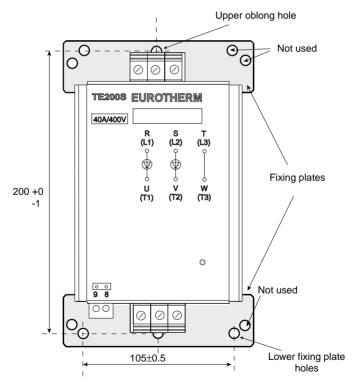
Bulkhead drilling and mounting dimensions (in mm) for the TE200S unit
